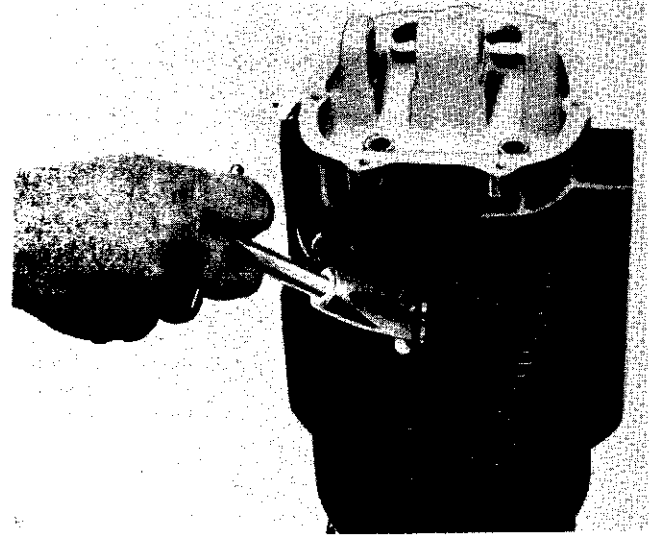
Removing Spark Plug Hole Heli-Coil Insert
